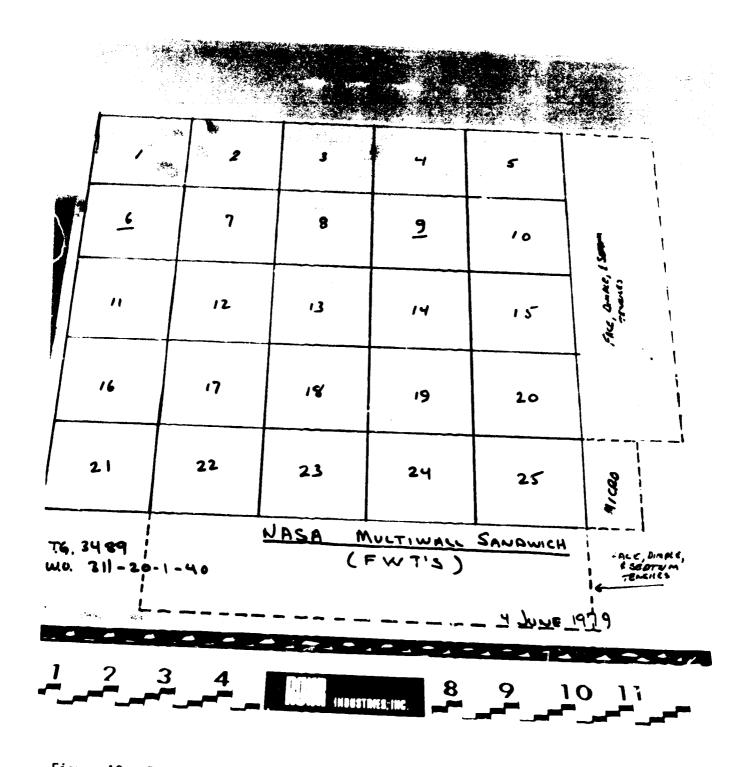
Beam Flexure Test Speciment Layout for Cutting Flatwise Face Tension, Tensile and Micro Specimens
